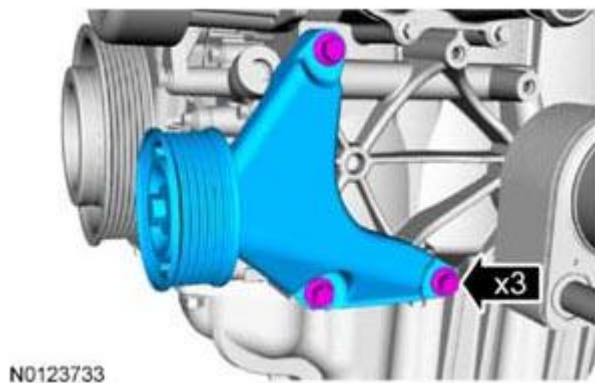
Locating Bolts And Accessory Drive Belt Idler Pulley Bracket
